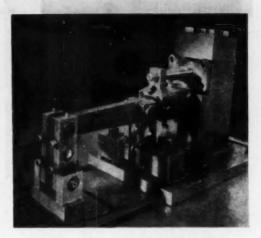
Here is a king-pin fixture for fatigue tests of front wheel spindles. The spindle is supported in three blocks by a vertical pin which is kept from rotating in the fixture by a key.
